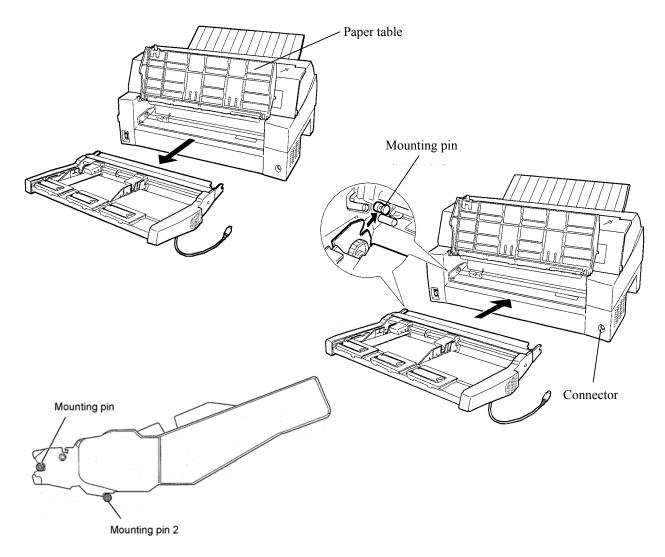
Front Cut Sheet Feeder Removal and Installation
